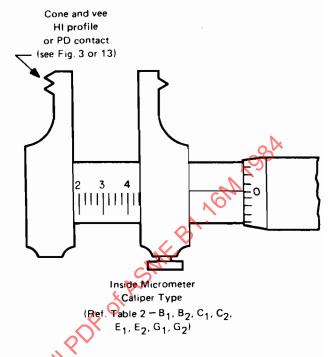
INSIDE MICROMETER, CALIPER TYPE
